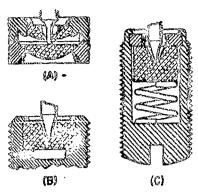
Plain and spring-cushioned V-jewel instrument bearings: (A) Ring and and stone jewel boaring, (B) V-jewel boaring, and (C) Spring-back jewel bearing.
